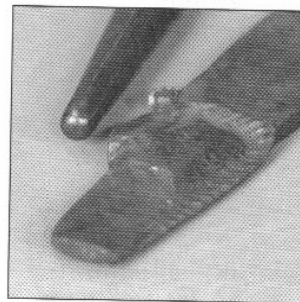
Use a bob-punch to open the eye socket to receive the eye punch
